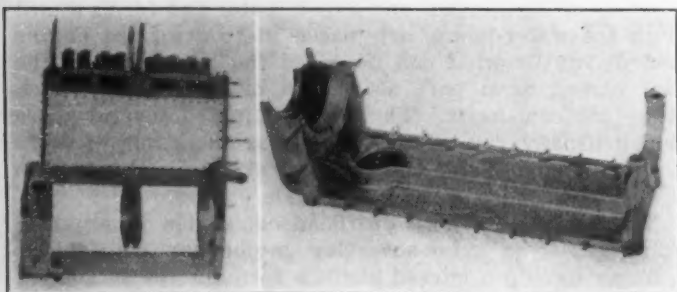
THE CYLINDER BLOCK AND THE LOWER HALF OF THE CRANKCASE WITHOUT THE SIDE PLATES AT THE LEFT AND AT THE RIGHT THE LOWER CRANKCASE WHICH CAN BE REMOVED WITHOUT DISTURBING THE CRANKSHAFT
